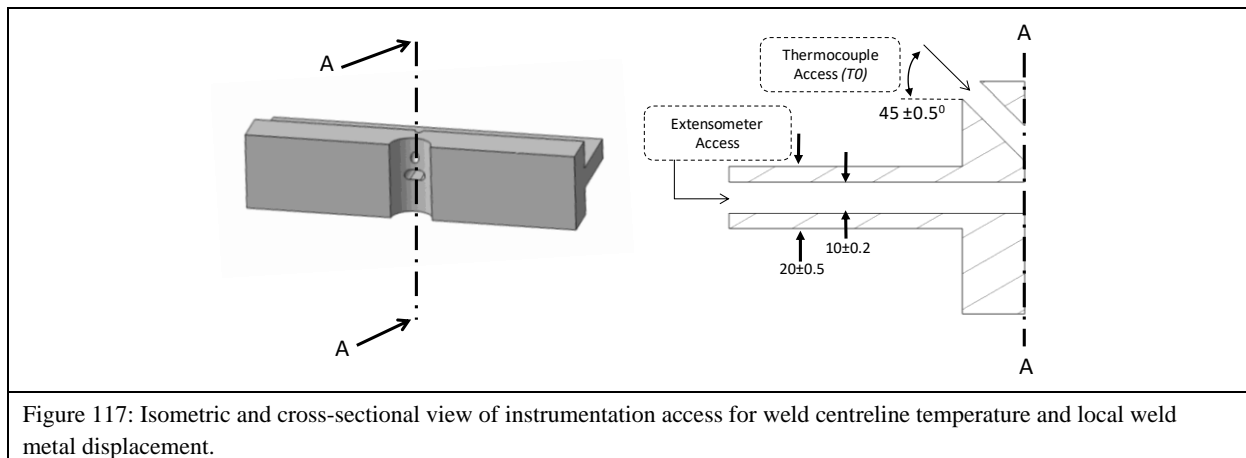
Isometric and cross-sectional view of instrumentation access for weld centreline temperature and local weld metal displacement.
